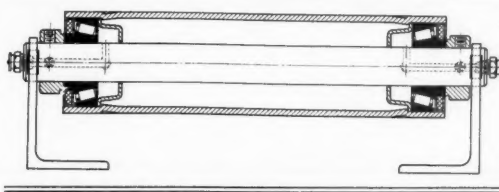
Bearing Mounting for Gravity Conveyor Roller
